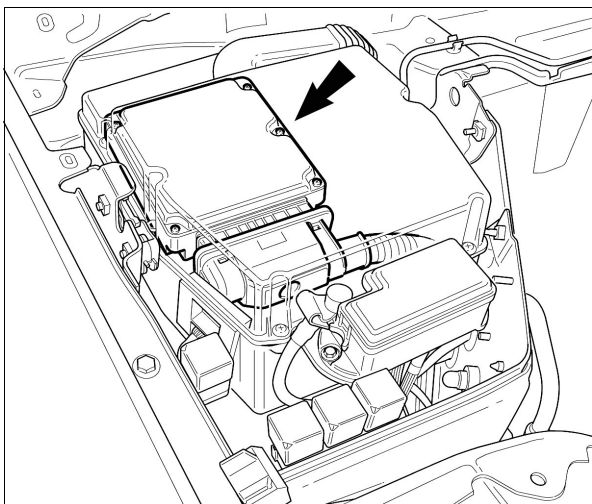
S-TYPE ENGINE CONTROL MODULE
